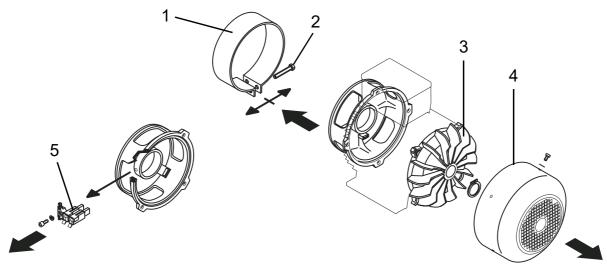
Preparatory work, disassembly of single-bearing brush generators
